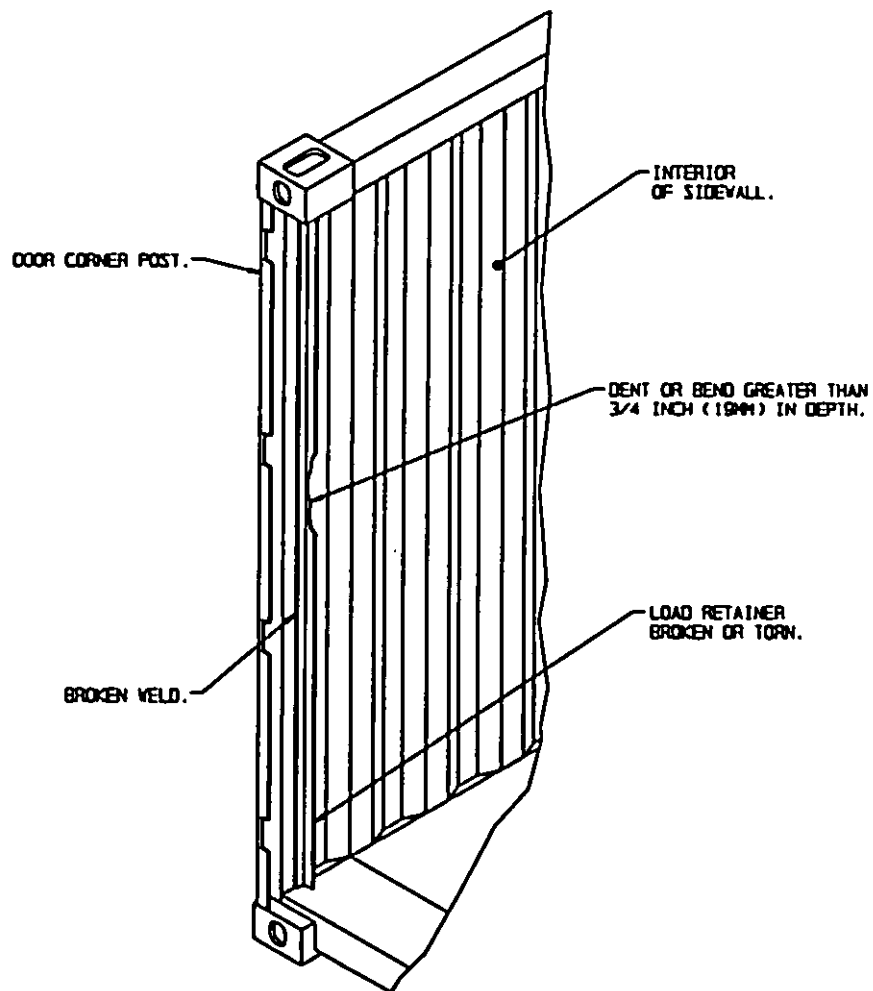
LOAD RETAINER DAMAGE
